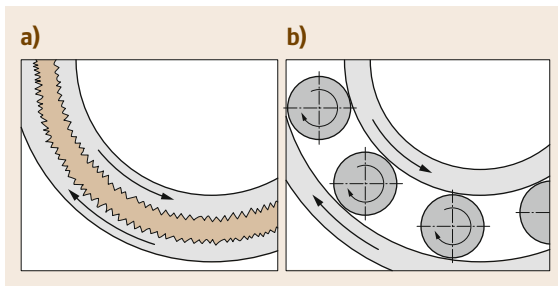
,b Plain (a) and rolling (b) bearings
